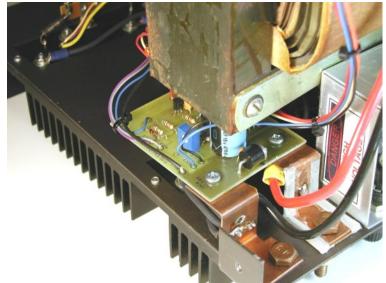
PS-15D-1 top view . Heat sink mounts on chassis which has a cut-out for Q1 to mount directly on the heat sink.
